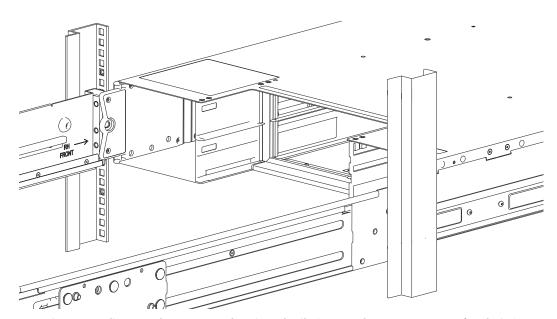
Alignment between 2U chassis and rails (removed rear components for clarity)
